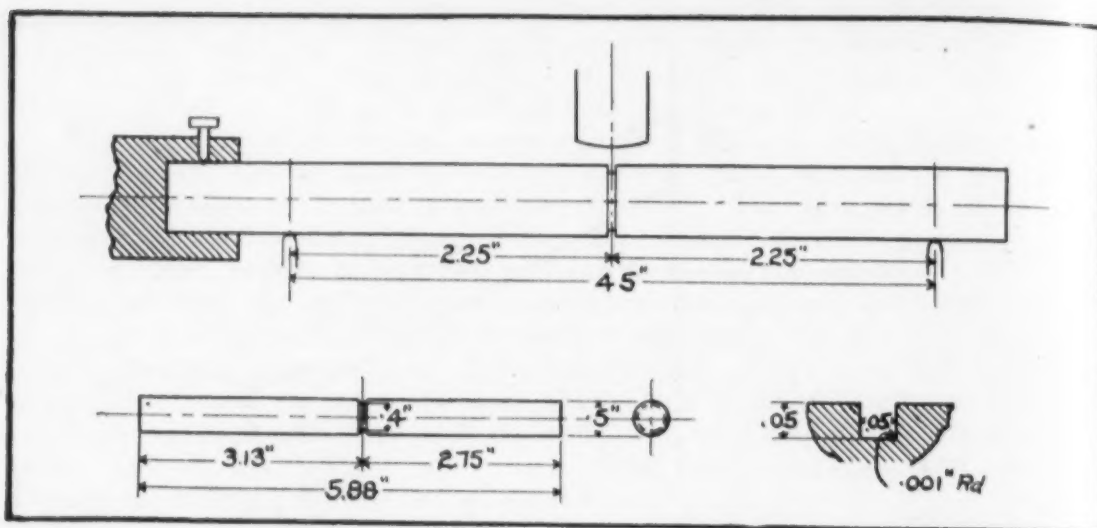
Arrangement of Stanton repeated impact machine with sketch of test specimen shown below
